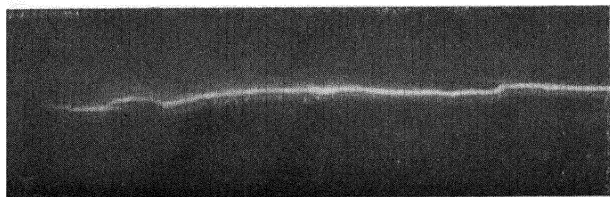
RADIOGRAPH SHOWING PART OF A DEEP FLAW IN A
